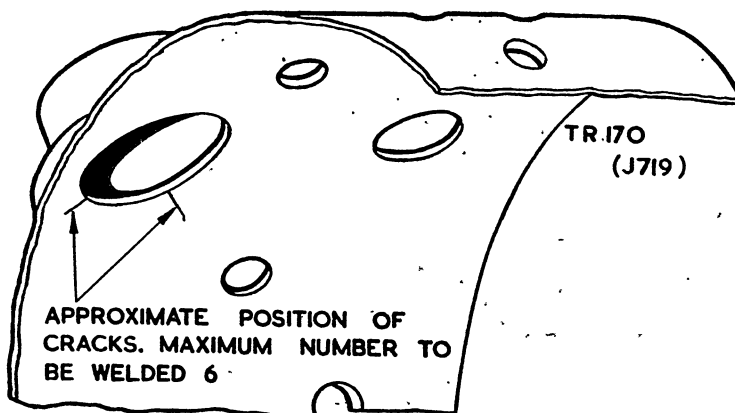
Example of cracks around the flame tube lip under the interconnecting flange
